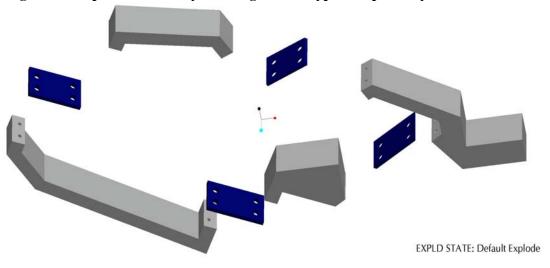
Synchronized Recline Mechanism Engineering Prototype Drawing
